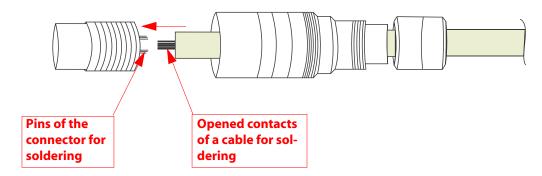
Inserting of a cable in the rear part of the connector
